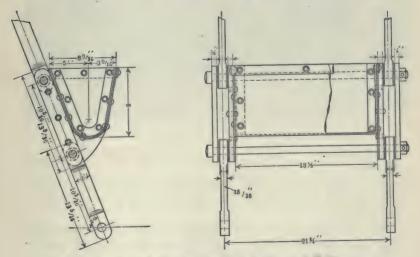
Bucket and Chain for Lührig Dewatering Elevator
